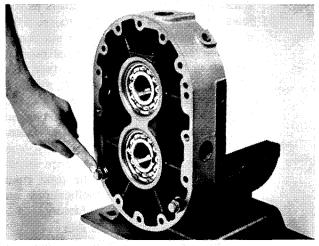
TWO CAPSCREWS WITH SPACERS USED TO TEMPORARILY FASTEN DRIVE END PLATE TO LOWER HOUSING HALF.
